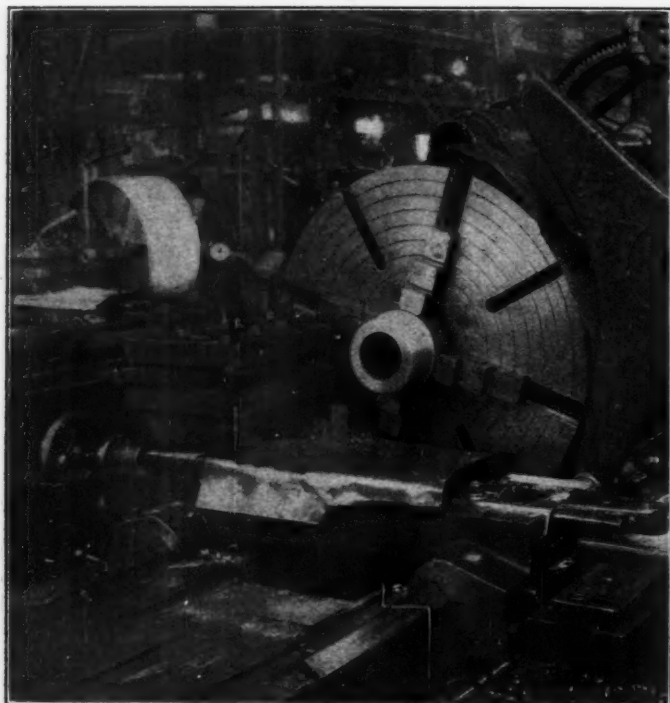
First Turret Lathe Operation in Finishing Two Part Piston Rod Vibrating Cups.
